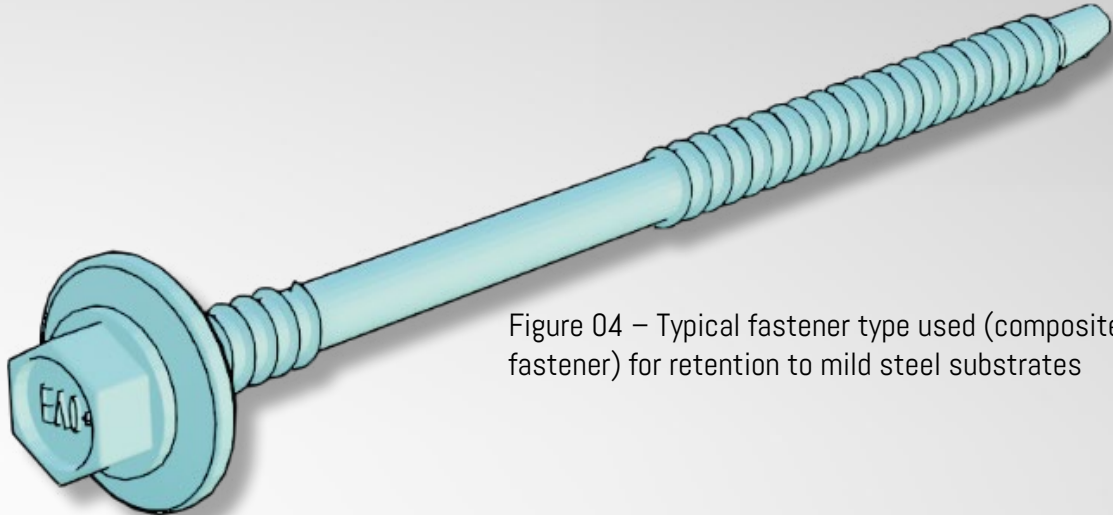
Typical fastener type used (composite panel fastener) for retention to mild steel substrates
